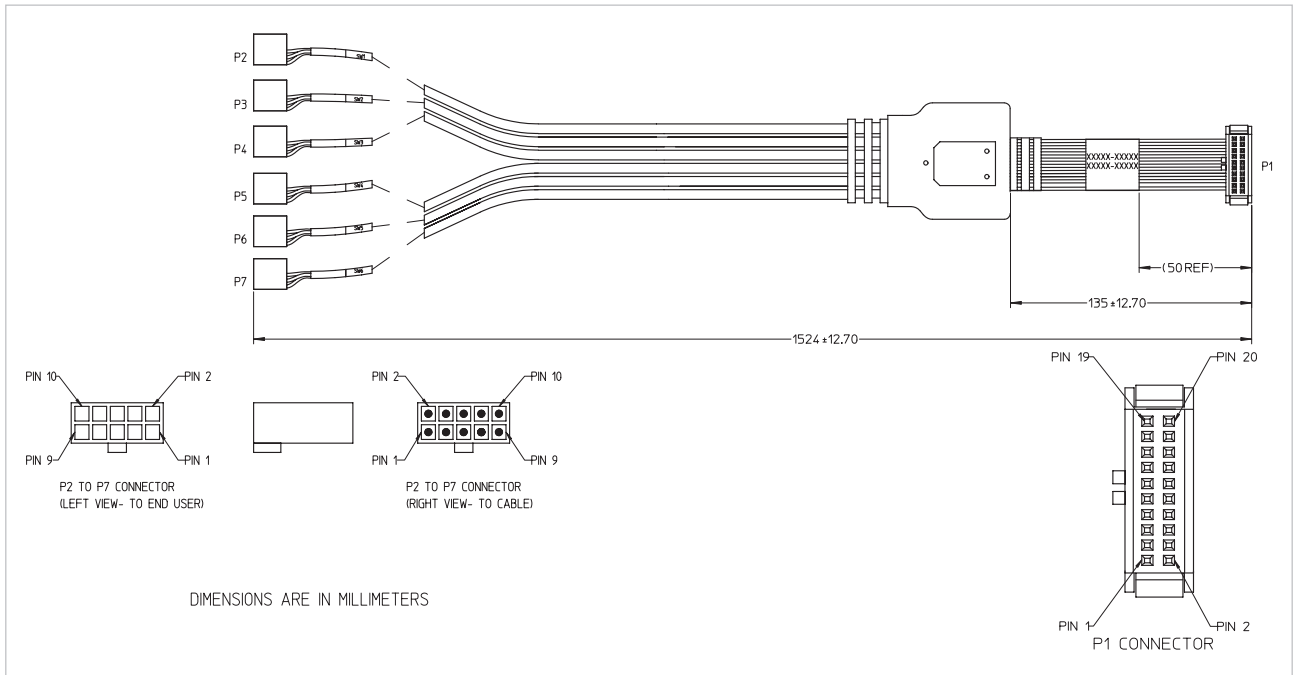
Option 001 - 20 pin to 6x10 pin interface cable assembly
